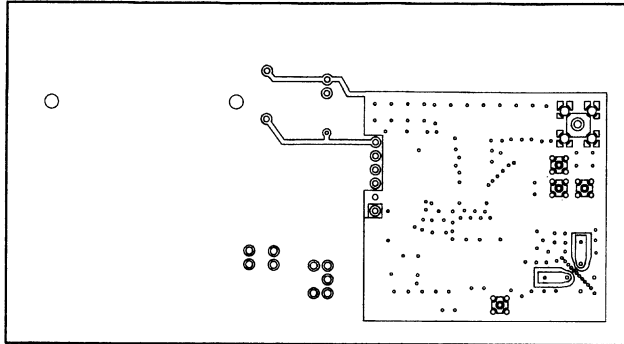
TRF1400 Receiver Test Circuit, Board Layout — Bottom Side
